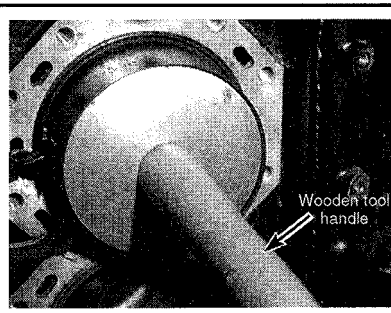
Gently tap the piston into position, through the ring compressor (or hose clamp, shown)
